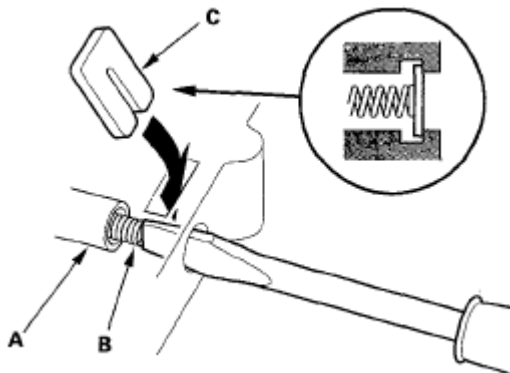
Installing Valve And Valve Spring Into Valve Body With Screwdriver
